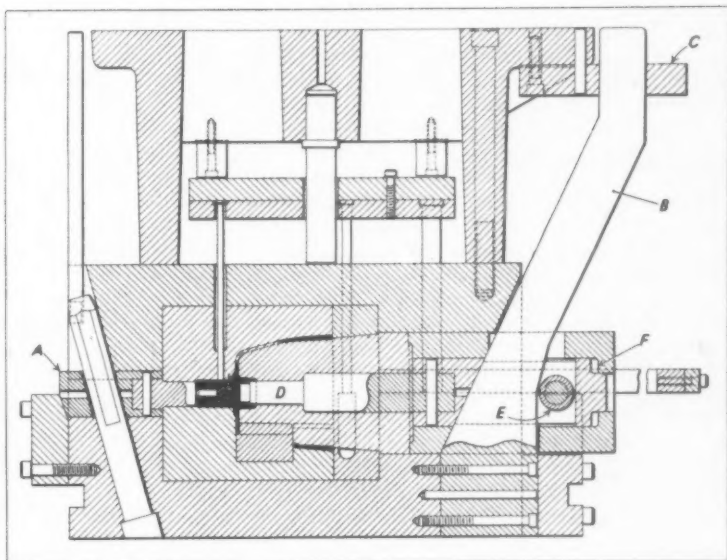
A View of the Die Employed for the Motor Housing of the Tarpen Hedge Trimmer, Showing the Finger Cam B which Operates the Main Core
